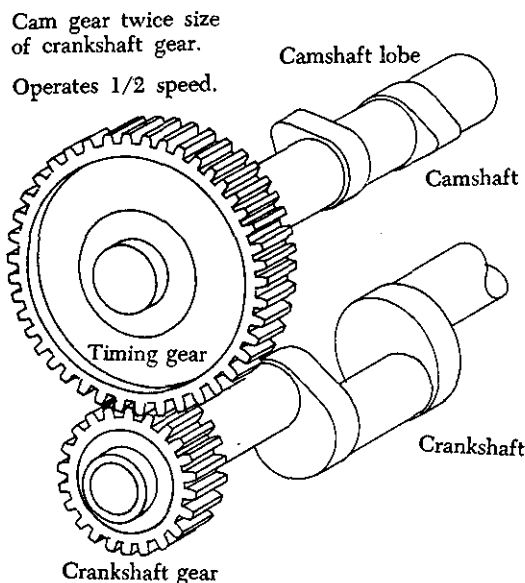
Cam drive mechanism opposed-type aircraft engine.
